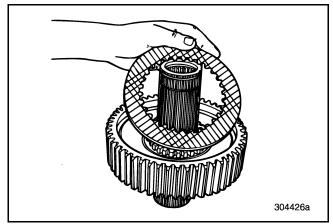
Installing Friction Disc (T313L/T318L Shown)
